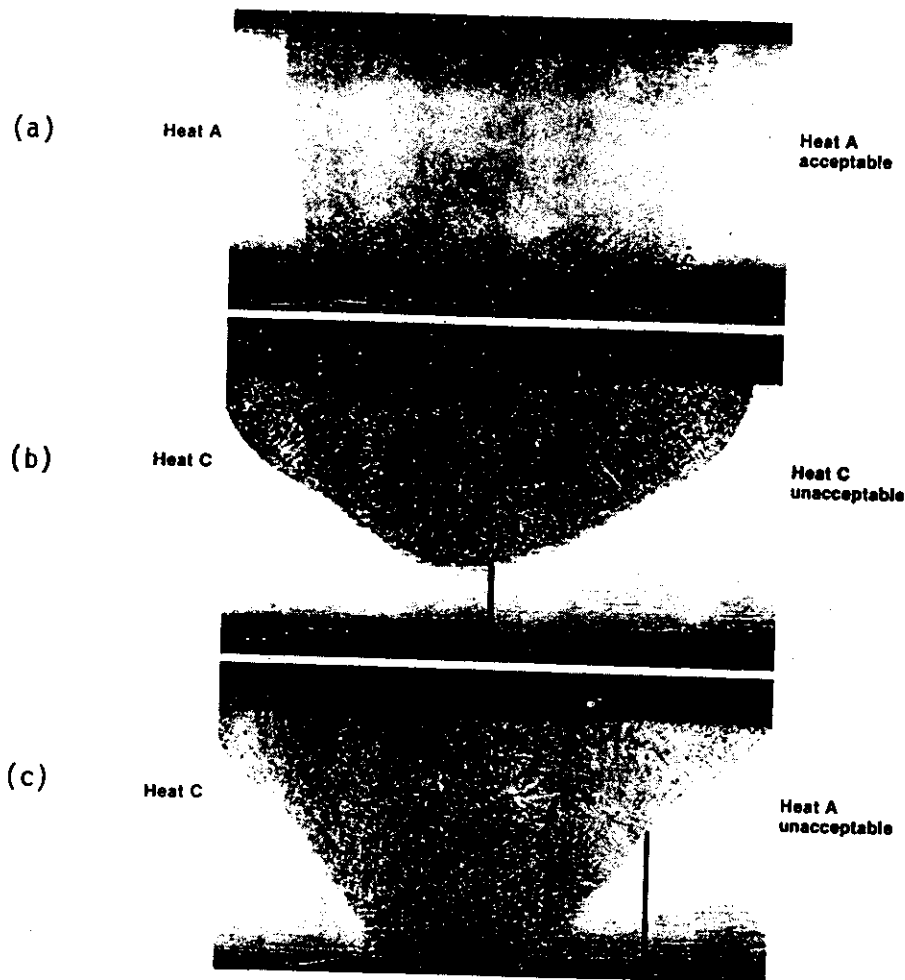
Base material effects on GTA weld cross-section in 25 mm x 2.4 mm 304L tubing.
